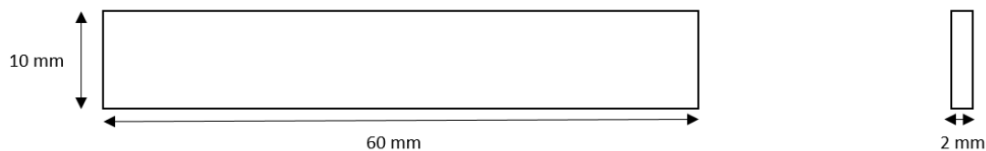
Geometry of printed specimens for 3PB testing, according to the standard ASTM D790. (adapted from [89]).
